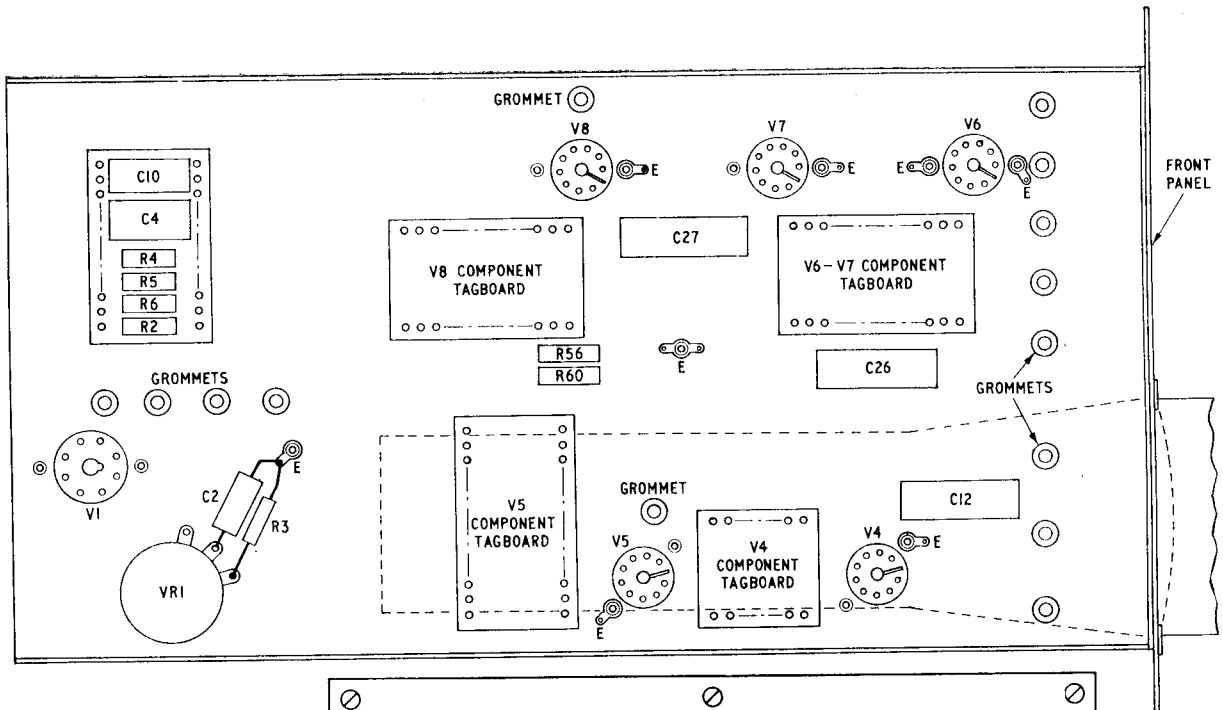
(above). Layout of tag boards and other major items underneath the chassis. Details of the component tag boards are given in Fig. 9
